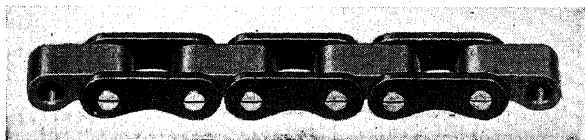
Block chain. (Courtesy Diamond Chain and Manufacturing Company.)
